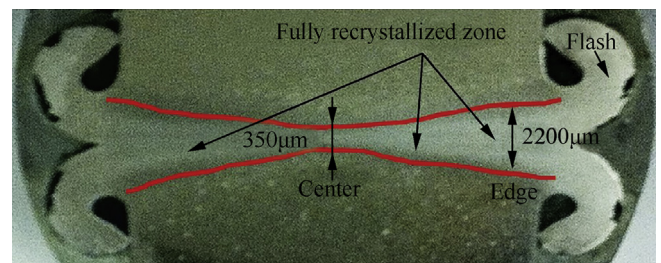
Cross section view of friction weld of Inconel 718 generated with 1500 RPM.
